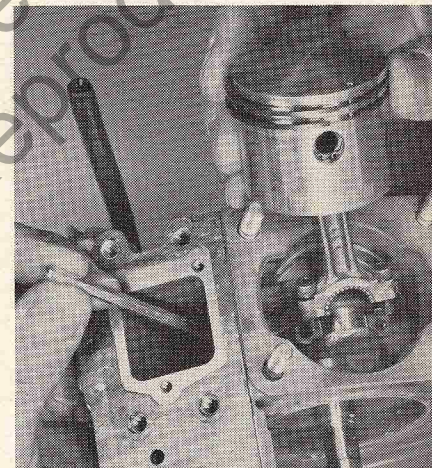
View showing reassembly of connecting rod to crankpin. Note that needle rollers are stuck to rod and cap with grease. Rod cap is held in position with Allen wrench. Be sure that match marks on rod and cap are aligned, and that intake side of piston is towards flywheel end of crankshaft as shown.
